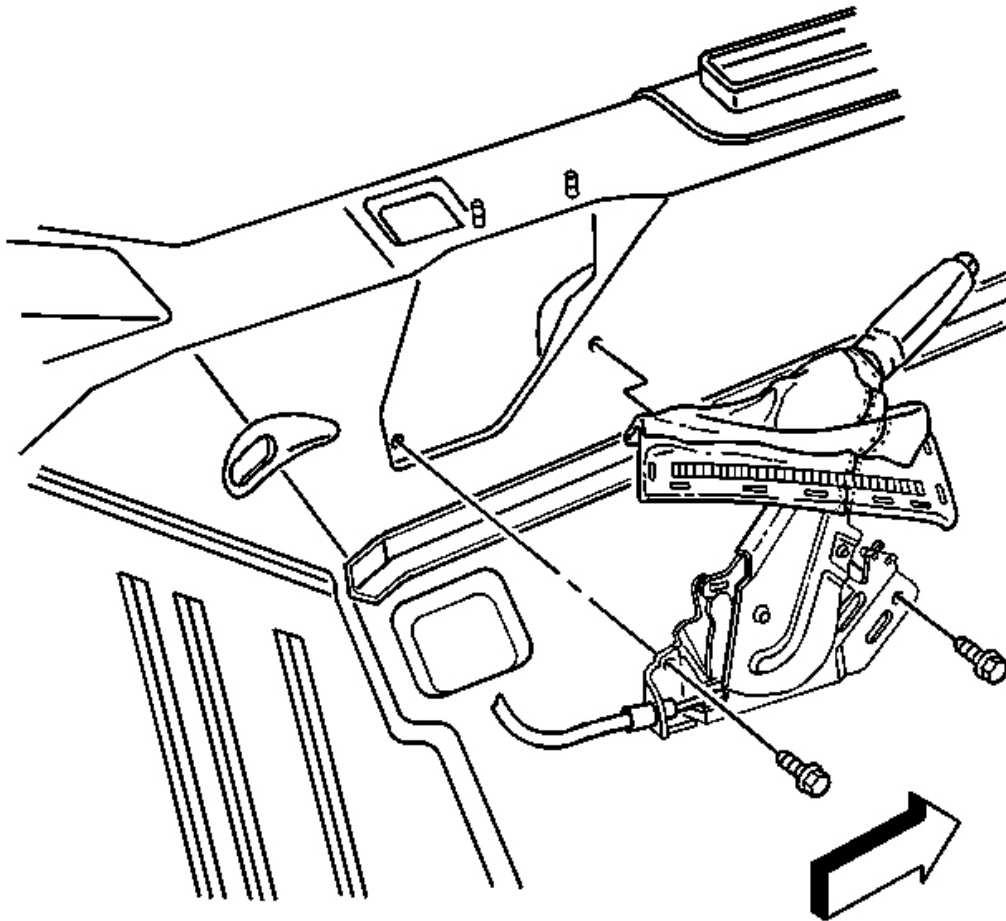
Parking Brake Lever Assembly Mounting Bolts
